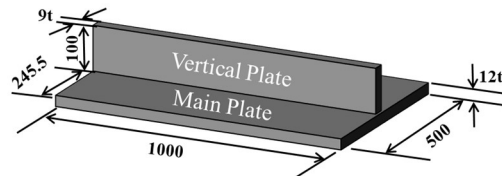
Test piece used for the Tee shaped-joint welding. (unit in mm)
